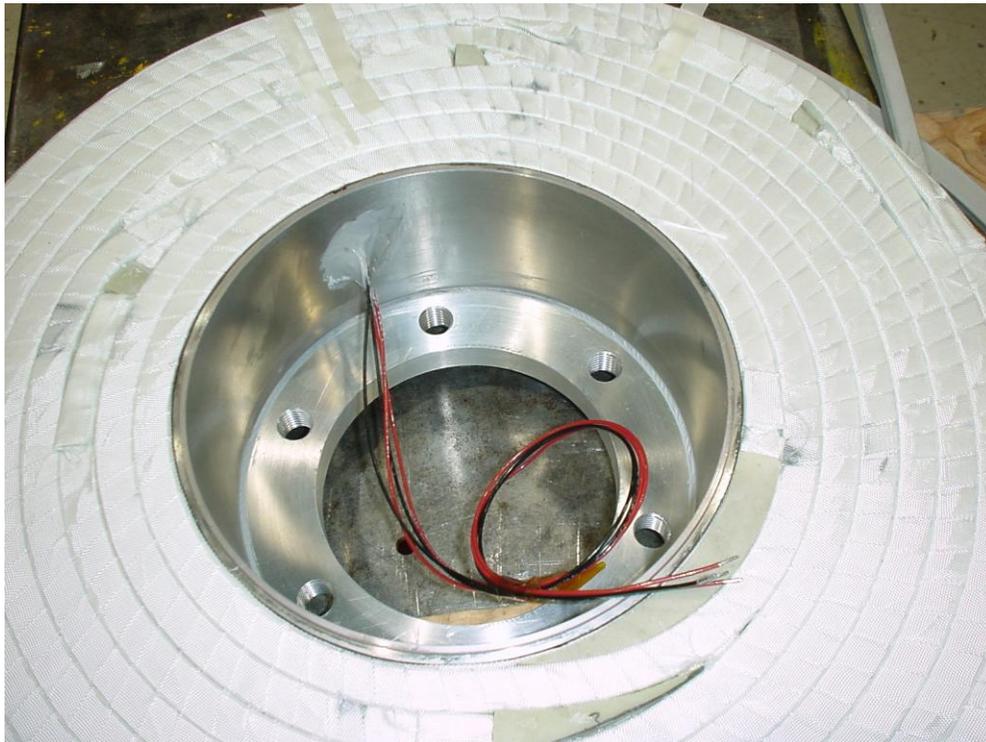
Test coil quench heating strip added external leads. Picture also shows RTV sealant on thru hole on bobbin
